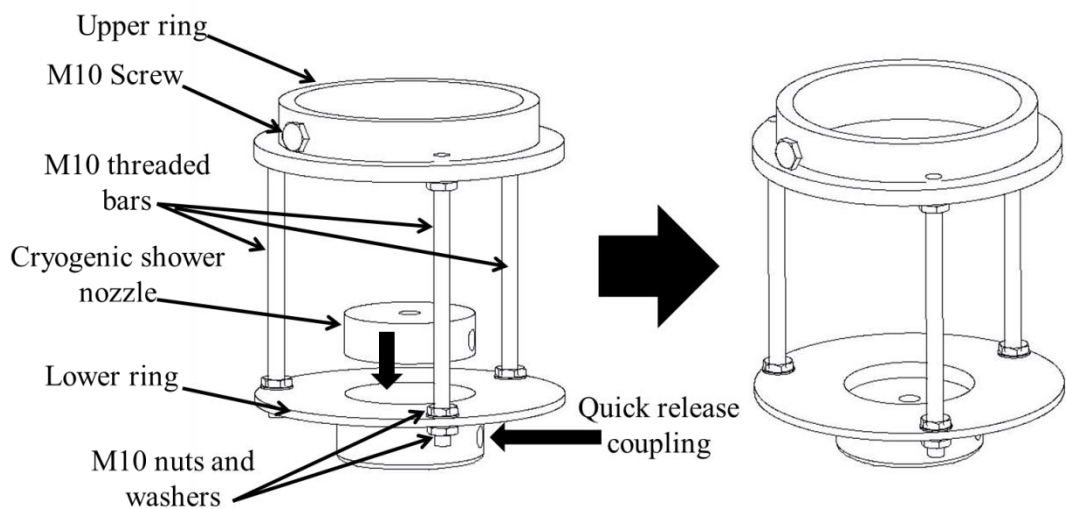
Final assembly and specifications of cryogenic shower nozzle and clamping system
